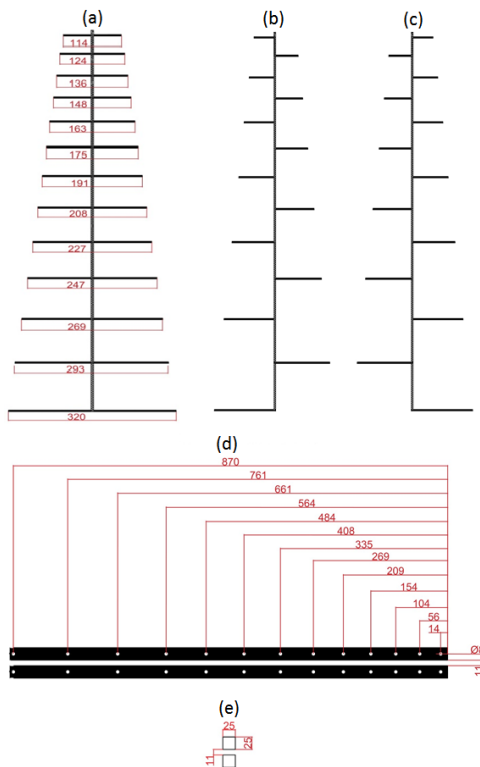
Antenna dimensions in (mm) of the full upper view (a), top upper view (b), bottom upper view (c), side view (d) and front view of basis (e).
